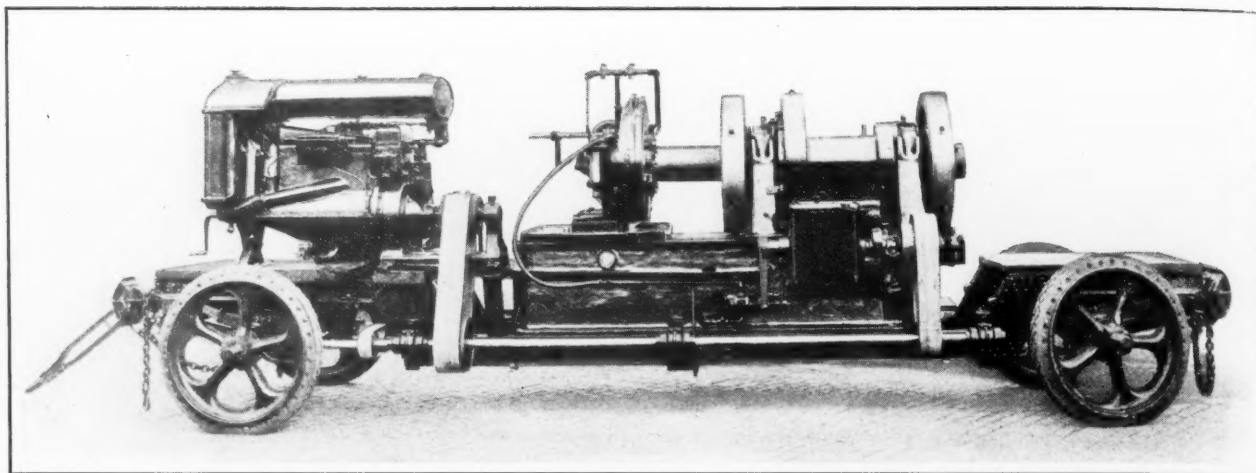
Rear View, showing the Drive from the Tractor Engine to the Two Machines
